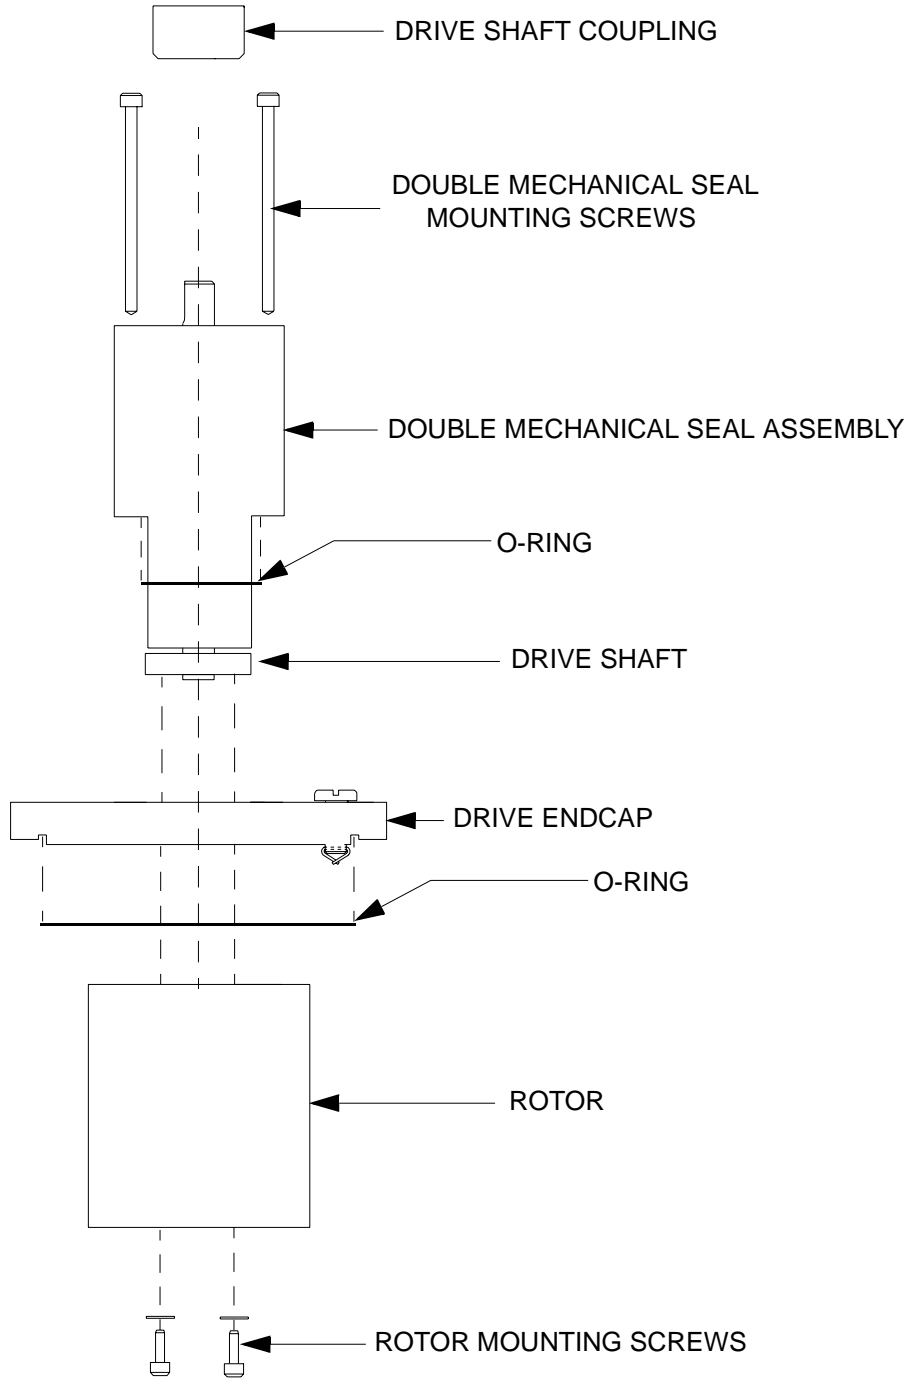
Drive Endcap Disassembly (with Double Mechanical Seal)
